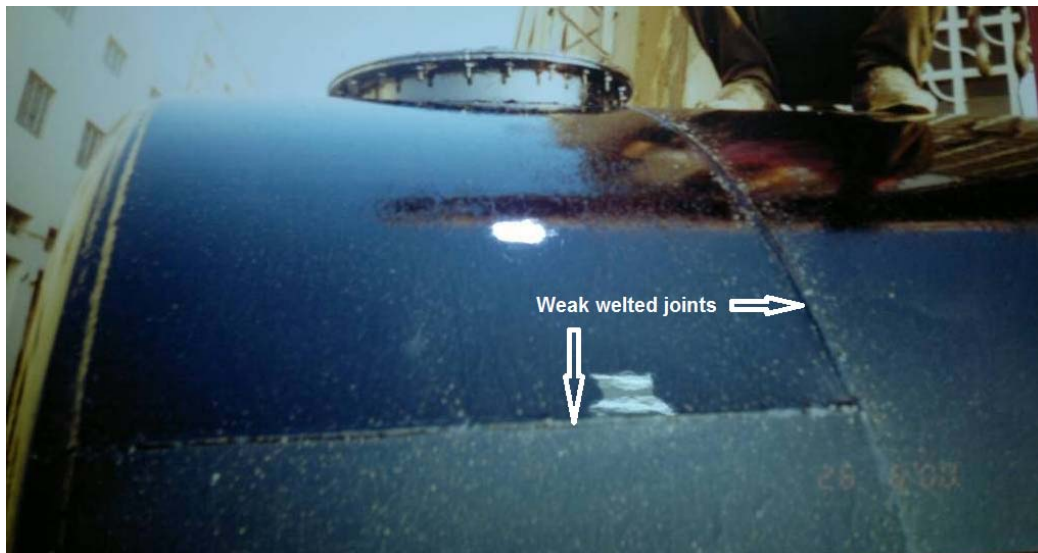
Outside view of a tank ready for use, showing the weak welded joints.
